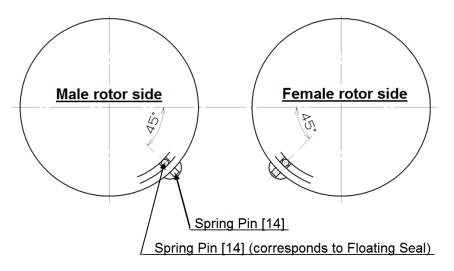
Spring Pins on the Main Bearing for the Bearing Head
